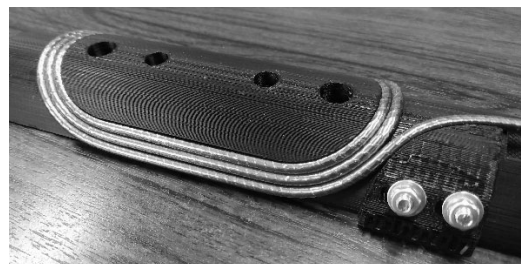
Three-turn saddle-shape coil wound with four-layer mockup cable consisting of 12 copper tapes.
